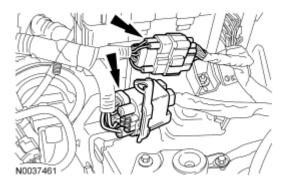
Locating Engine Wiring Harness Electrical Connectors Courtesy of FORD MOTOR CO.
